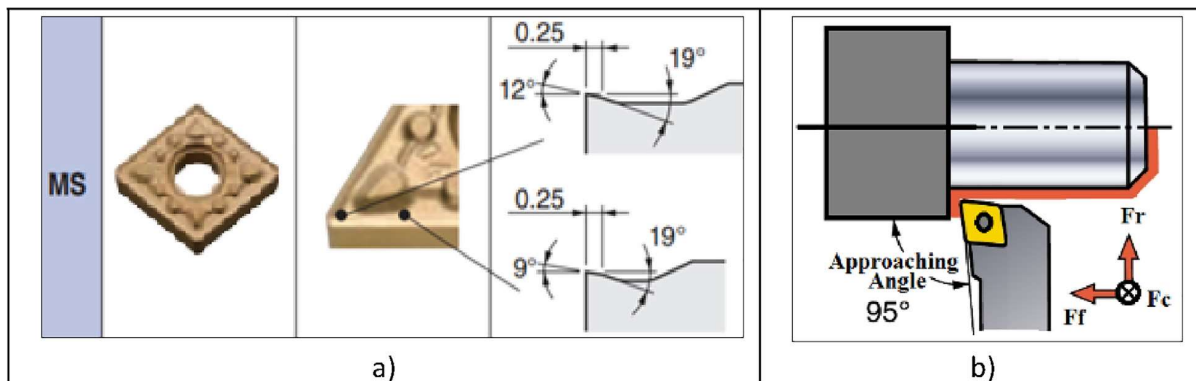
a) Chip breaker geometry on the inserts, b) Cutting force components [49].
